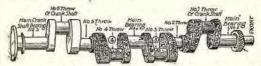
A solid crank shaft, with three main bearings; six cylinder.
